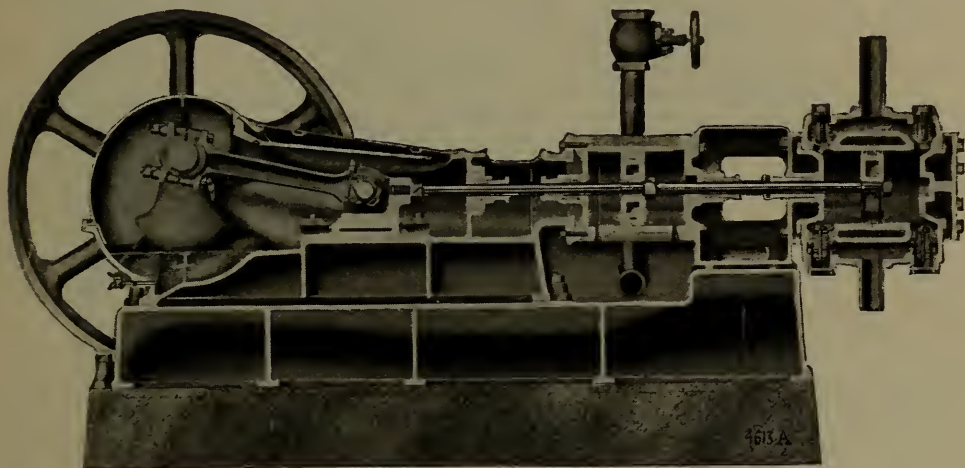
Cross-section through air compressor equipped with a poppet valve cylinder.
